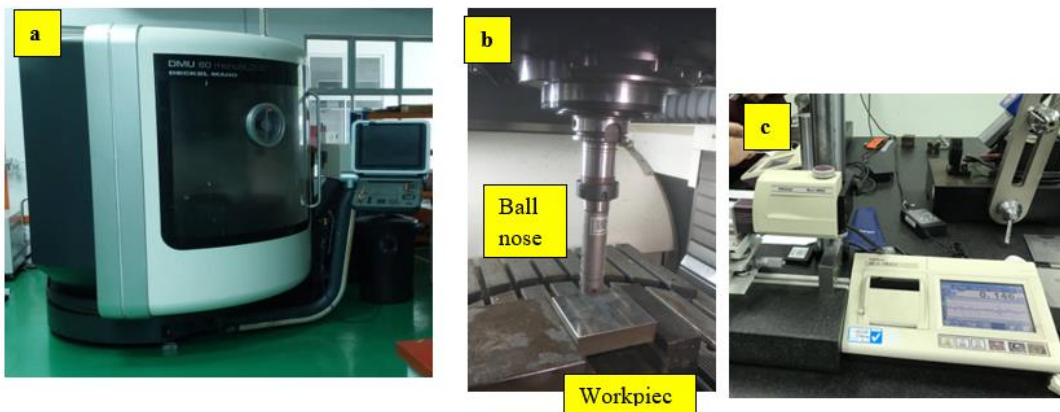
(a) CNC milling machine (DMU 60 Monoblock); (b) Machining setup; (c) Mitutoyo surface roughness tester.
